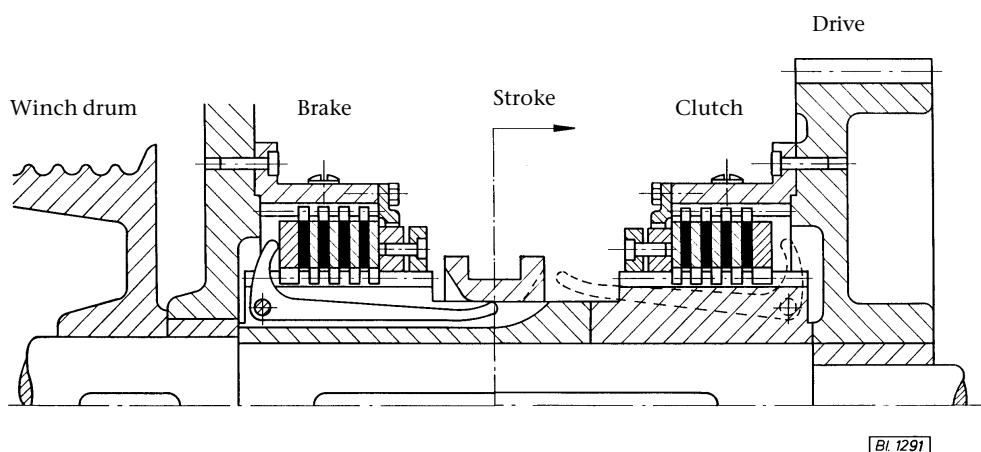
Sinus® multi-plate double clutch series 0300-020-, with flange housings (intermediate position without function) fitted in a cable winch.
